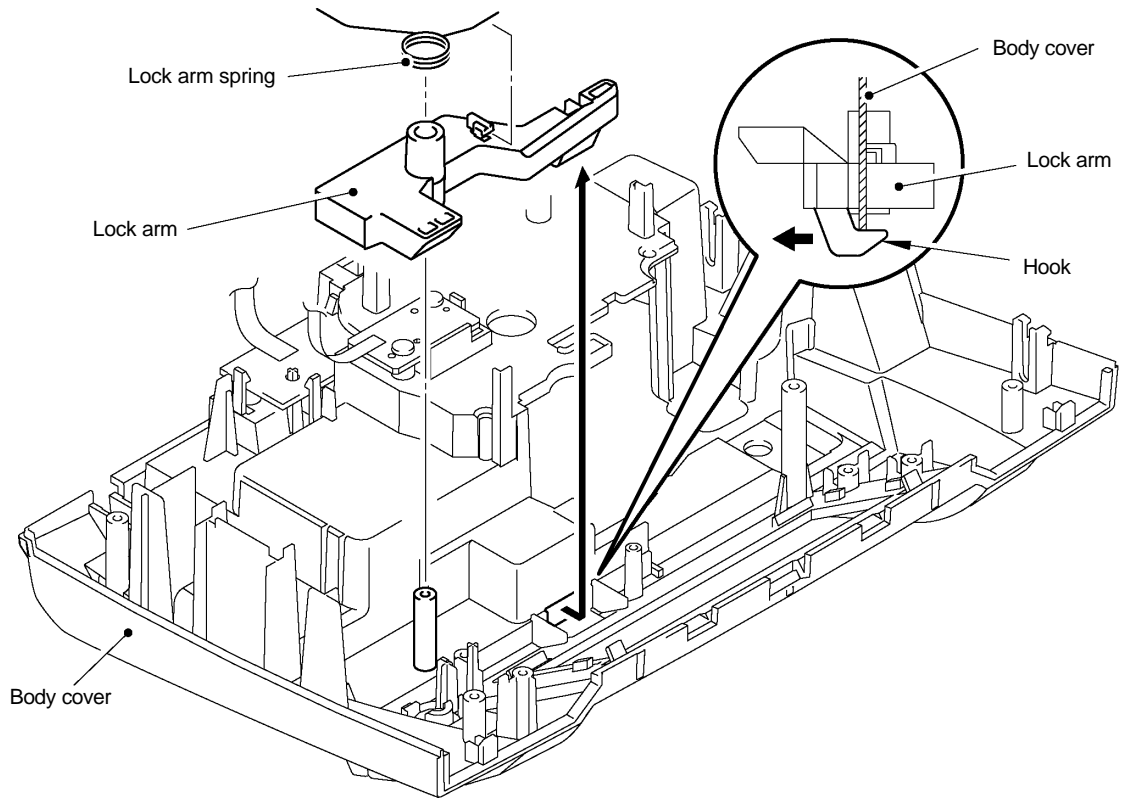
Removing the Lock Arm Spring and Lock Arm
